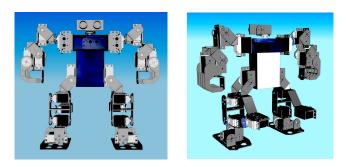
3D CAD Model of the Proposed Platform (a) Front view (b) Back view
